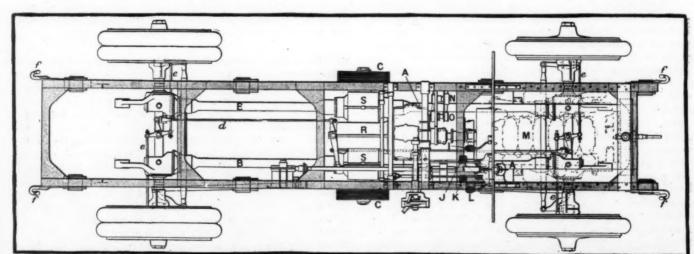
Plan view of Panhard et Levassor tractor-truck chassis with four-wheel driving and steering—AA, front-wheel drive shafts—BB, rear-wheel drive shafts—M, six-cylinder motor—R, differential—SS, incased bevel-gears at ends of jackshaft—N and O, shaft and clutch for control of winch—d, E, wheel-brake rods—f, f, f, trailer hooks
